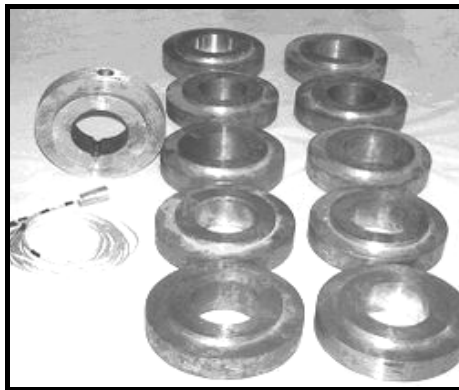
Assembly of conical pin fitted Pt-Pt/Rh thermocouplings
